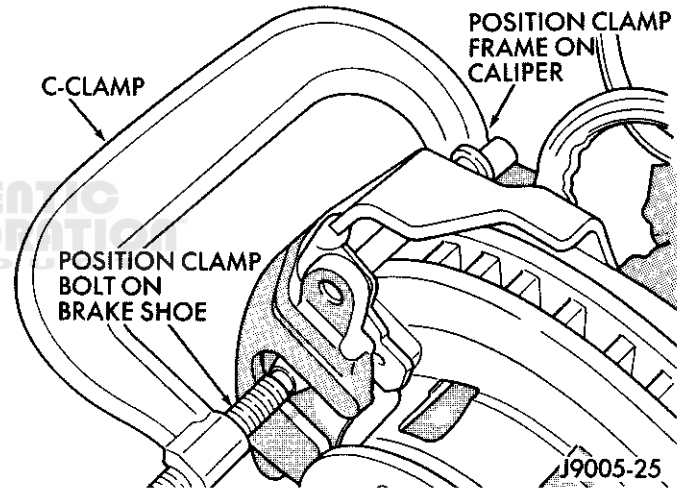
Bottoming Caliper Piston With C-Clamp—
